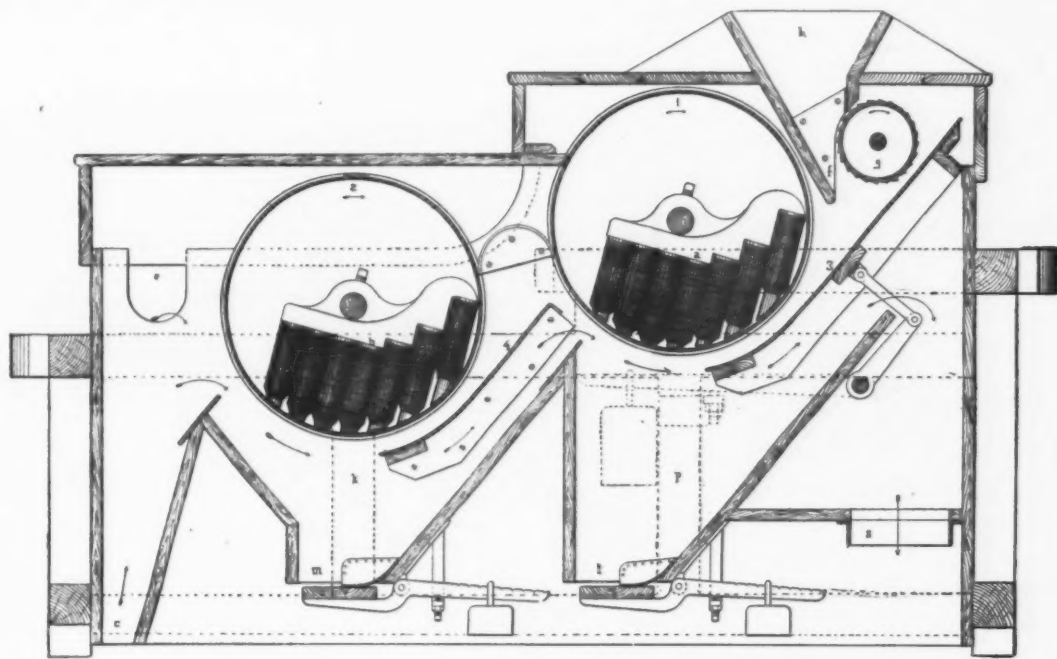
Monarch Machine Adapted for Cobbing Ore the Size of Stove or Chestnut Coal.
